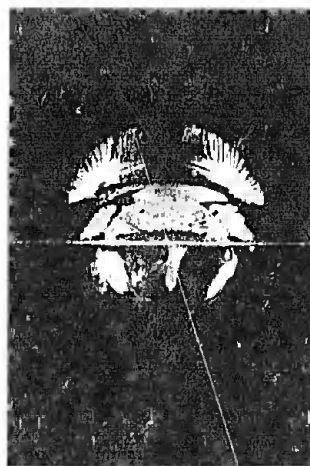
Photos of Three Dimensional Flaws with Extended Cracks.
